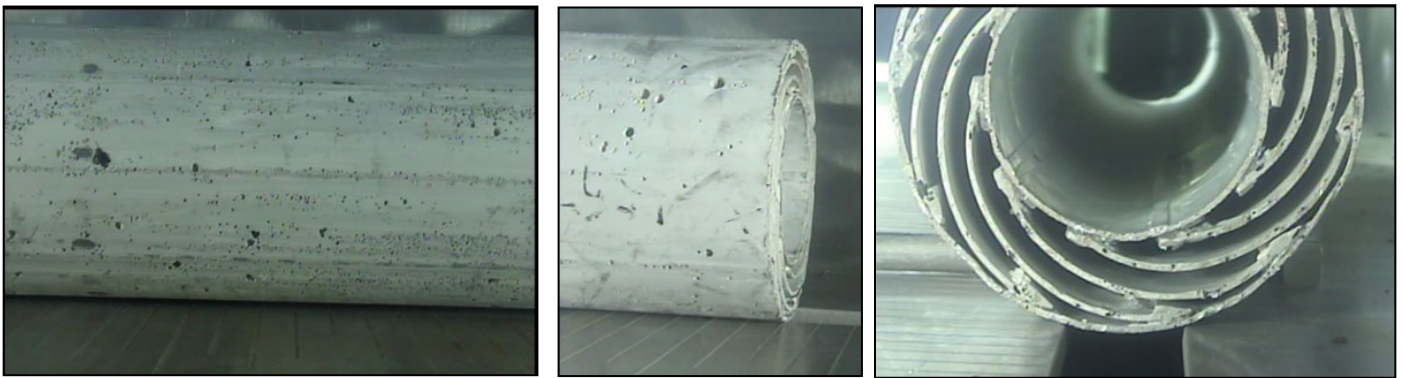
HIFAR UED 1567 (left two pictures) outer casting (non-fuel) showing pitting attack. Right picture, bottom view of HIFAR UED 1567 showing crevice corrosion and end grain attack.
